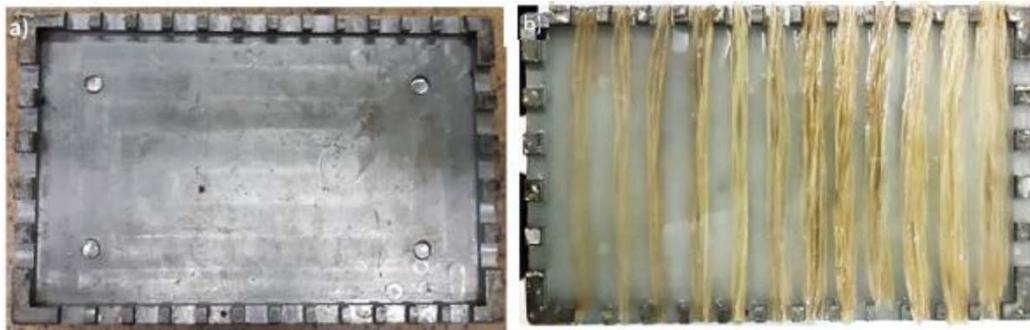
Mold filling: a) Empty mold, b) Mold with fiber groups being accommodated.
